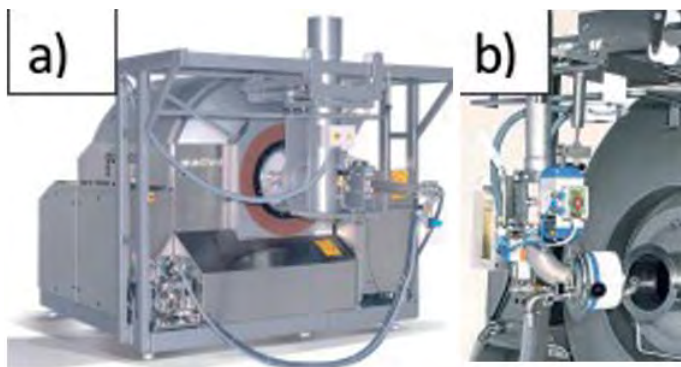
A coating tumbler: a) a scheme b) a view.
